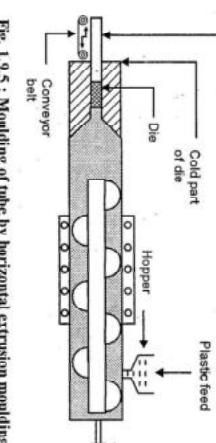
Moulding of tube by horizontal extrusion moulding
